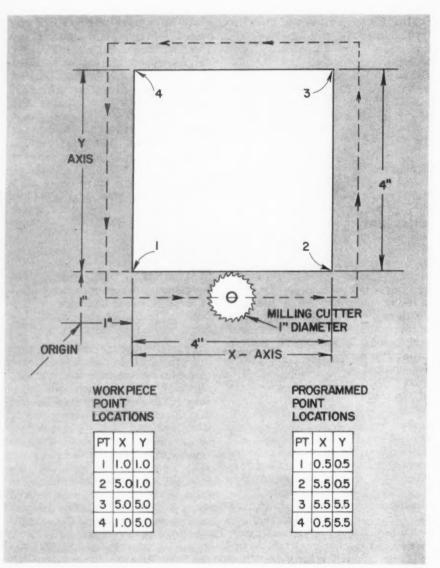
This example of profile milling around a 4 x 4-inch piece of stock with a one inch diameter milling cutter shows how the programmer must allow for cutter offset. Since the programmed points are followed by the center point of the cutter and the
